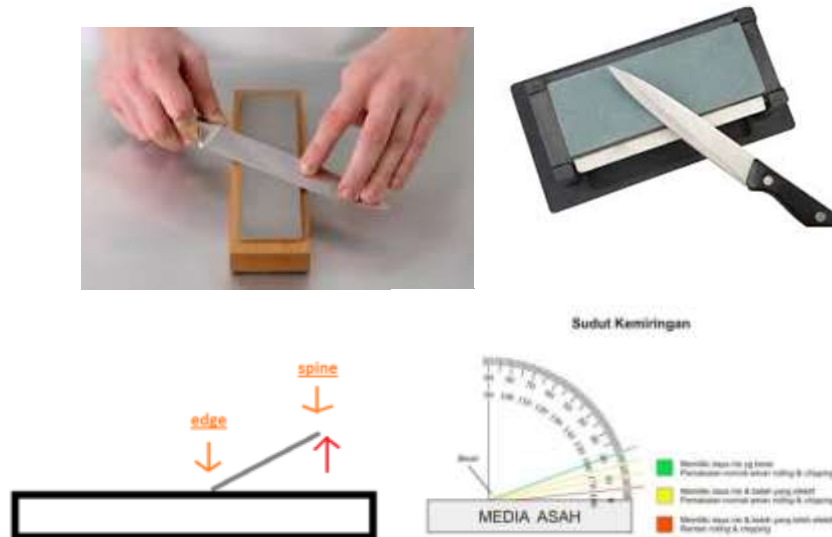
Slaughter Knife Sharpening Technique Using a Whetstone (Grit 1,000/6,000).
